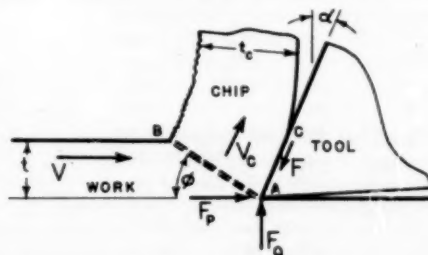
CONDITIONS AT POINT OF CUTTING TOOL DURING CONTINUOUS CUTTING. WIDTH OF CUT ALONG CUTTING EDGE =  $b$
